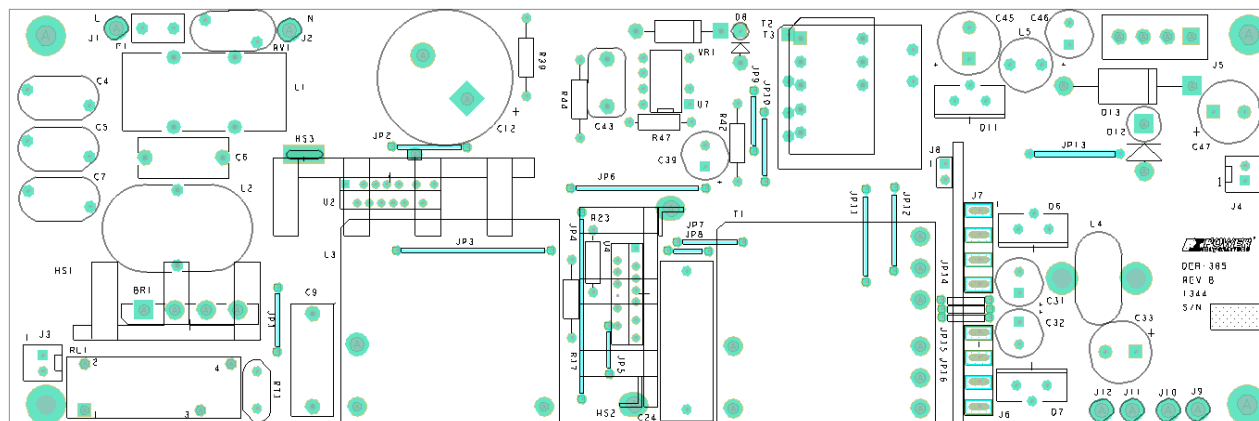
Printed Circuit Layout – Main Board, Top Side.
